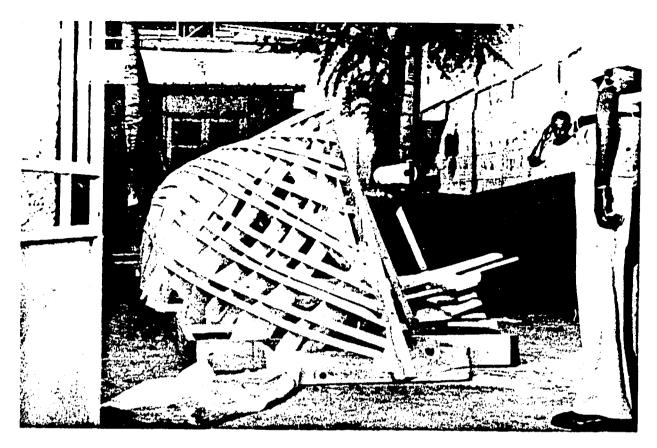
VIEW OF FRAMES SHOWING HOW MODIFIED TO INCORPORATE FLARE
